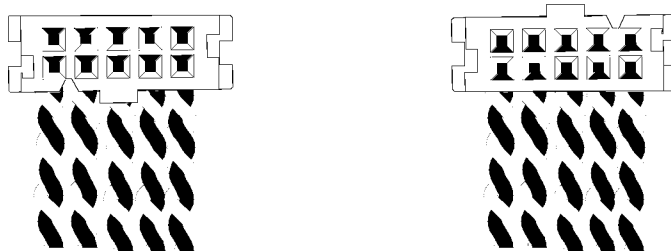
Start of Cable (left drawing) and End of Cable (right drawing)
